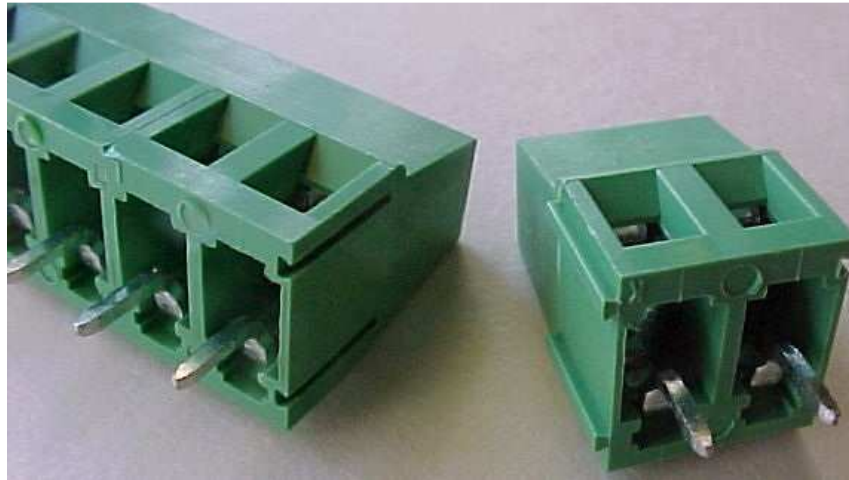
Connect the terminal blocks together using the slide slots before soldering to the printed circuit board.
